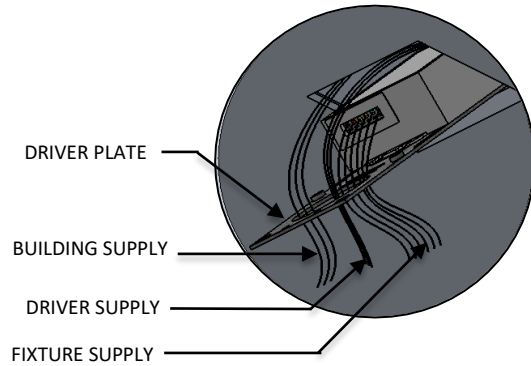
DETAIL SHOWING BUILDING SUPPLY AND DRIVER WIRE
